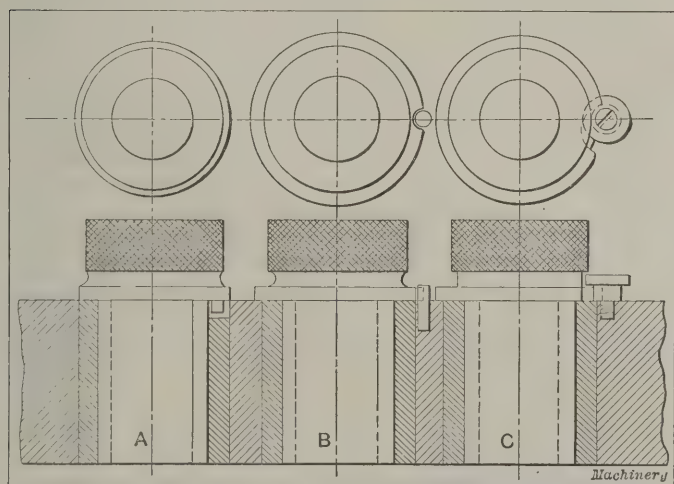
Methods used for Preventing Jig Bushings from Turning
